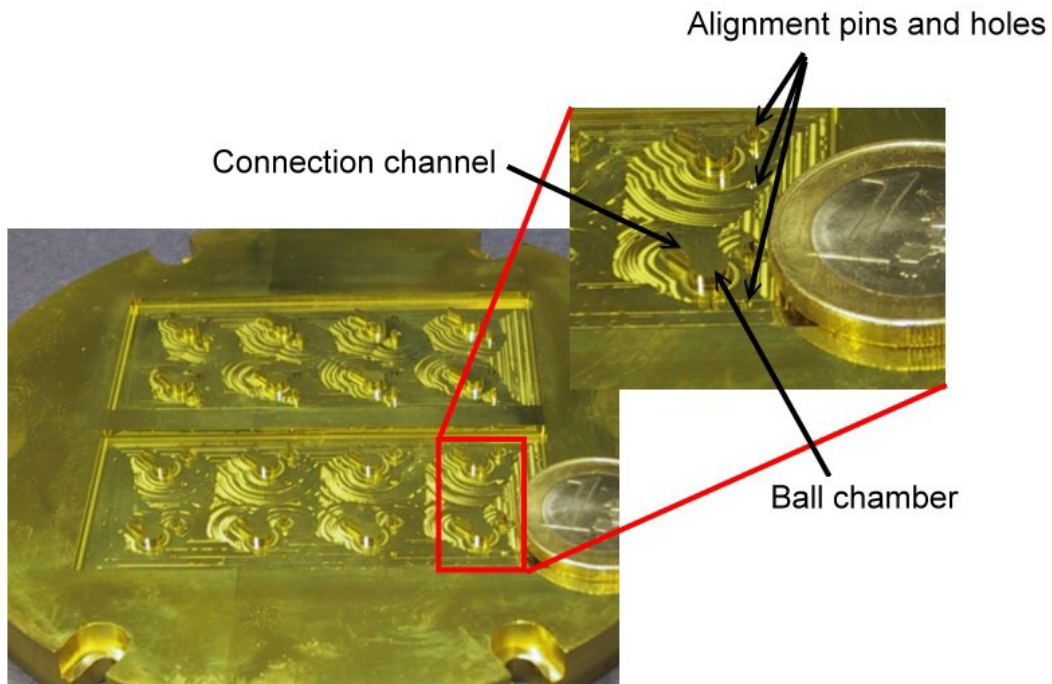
A mold for the ball chamber layers fabricated by ultra diamond milling (I-sys GmbH). The obtained surface roughness is $R_a = 200 \text{ nm}$.
